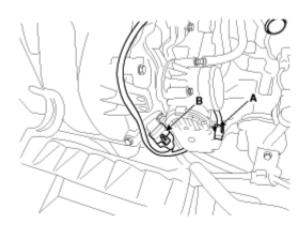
Identifying ETC Connector Courtesy of HYUNDAI MOTOR CO.
